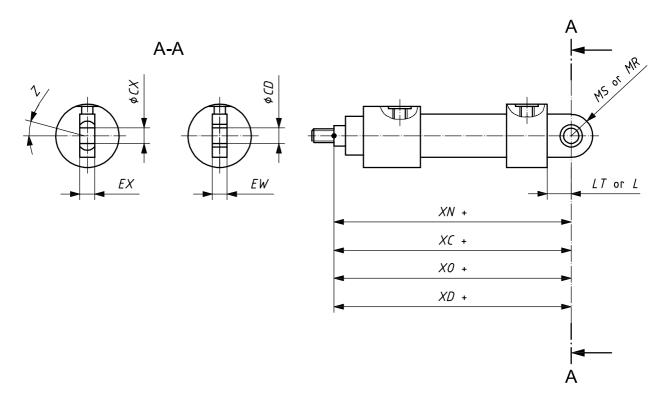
MP 3 — Cap, fixed plain eye, MP 4 — Cap, detachable plain eye, MP 5 — Cap, fixed eye with spherical bearing, MP 6 — Cap, detachable eye with spherical bearing
